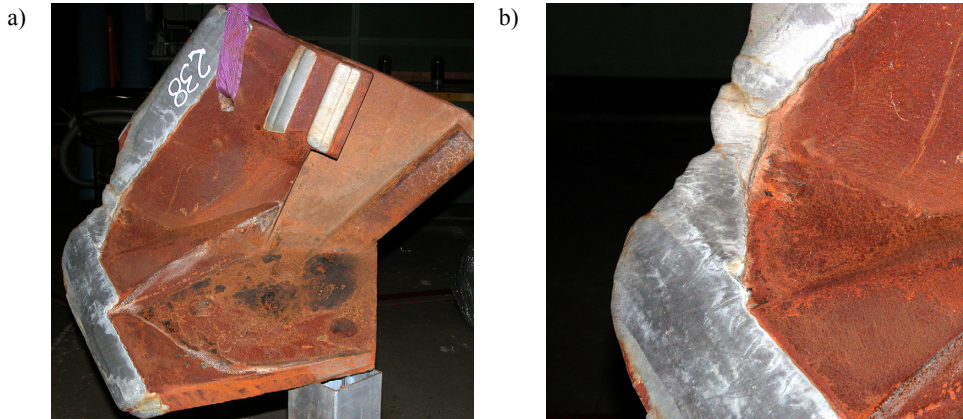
Worn cutting edge 238 (left)/plasma-arc powder surface-weld
